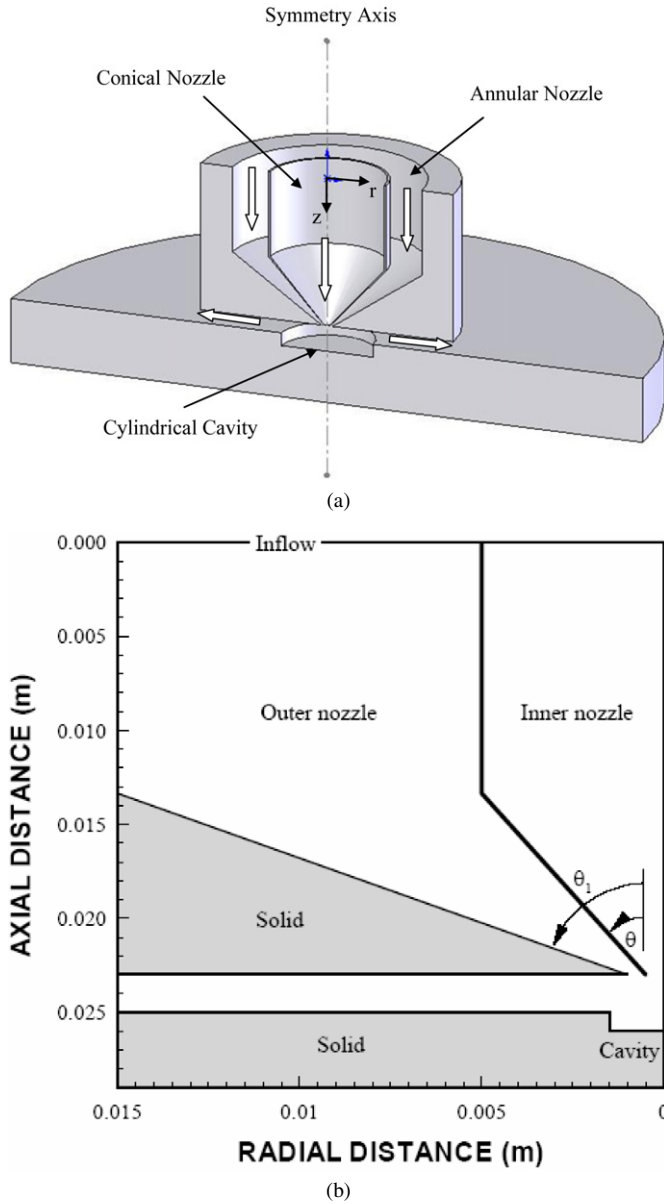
(a) 3-Dimensional view of the combined nozzle and the cavity. (b) Geometrical configuration and solution domain of combined nozzle and the cylindrical cavity.
